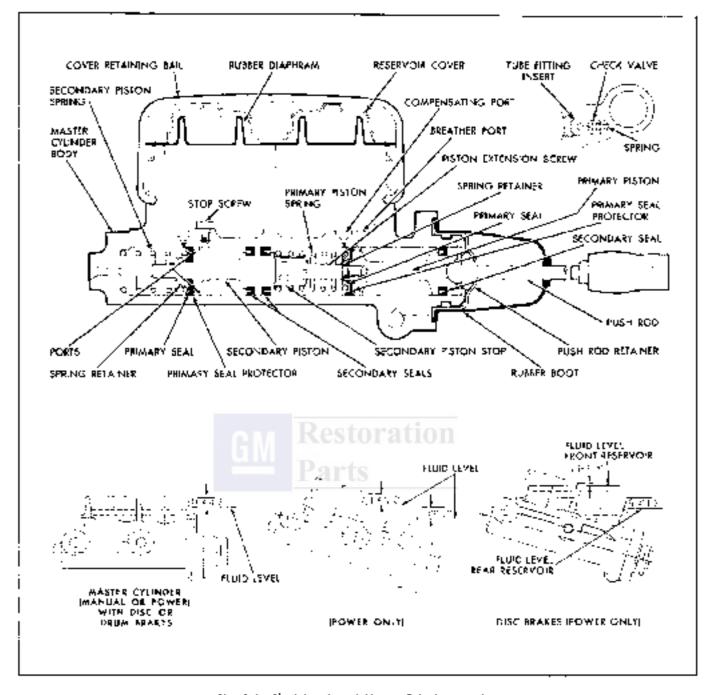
Fluid Levels and Makier Cylinder Details
